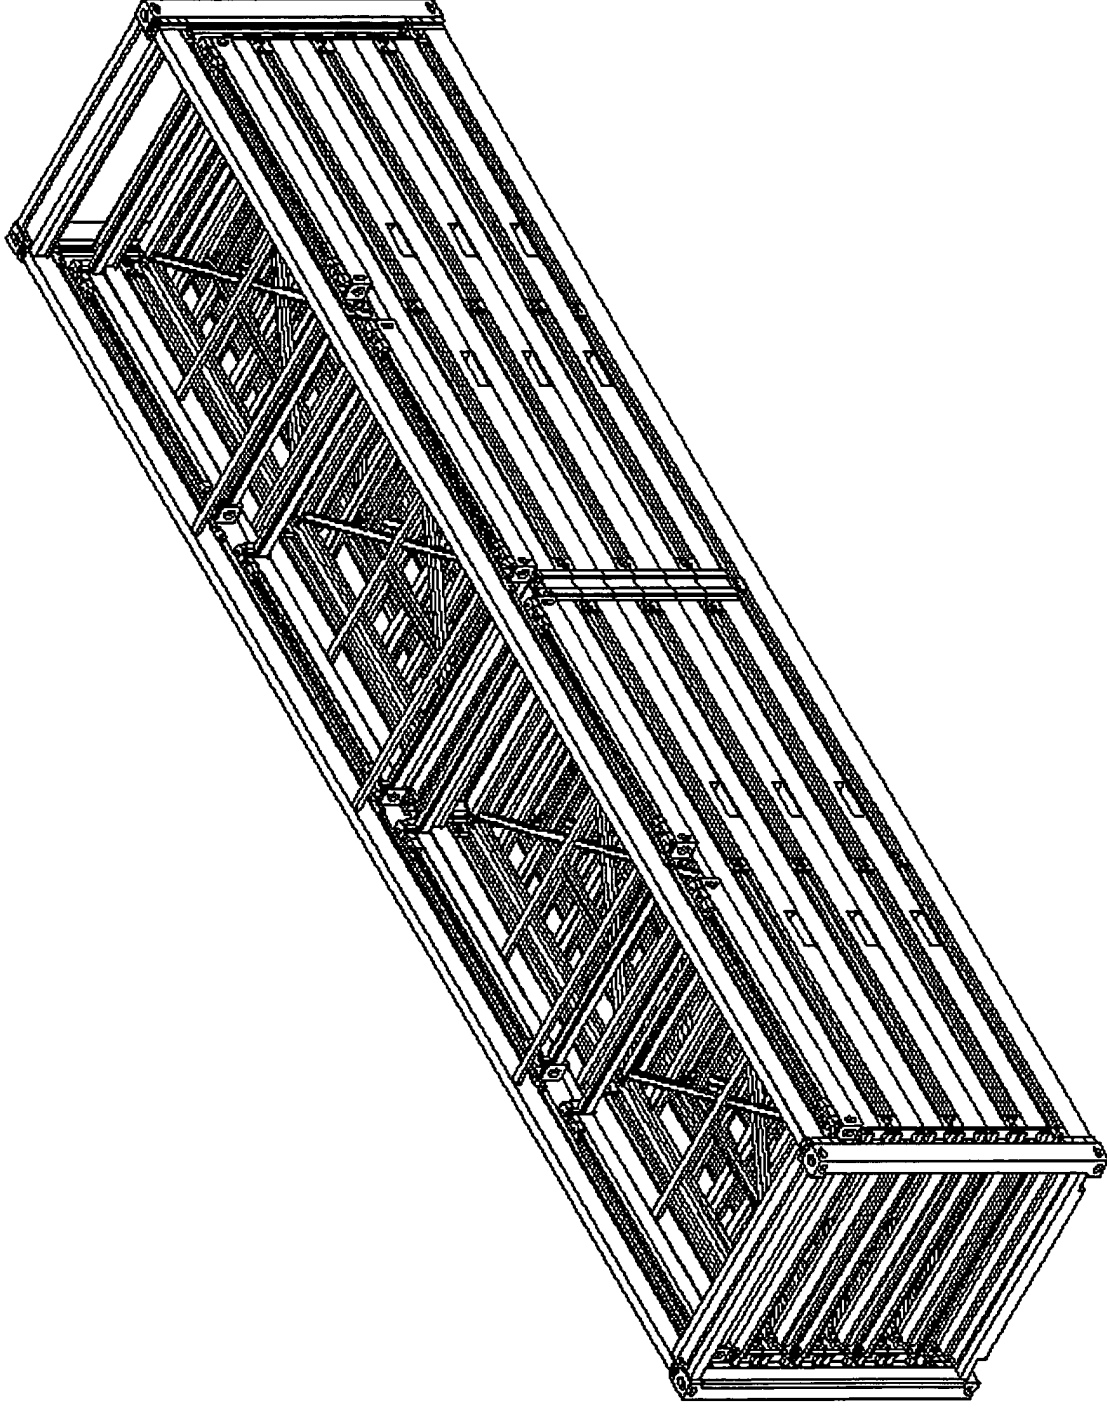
C: Step8 of disassemble and load process: The ceiling frame of the 40 foot shipping collapsible cargo container is assembled.
